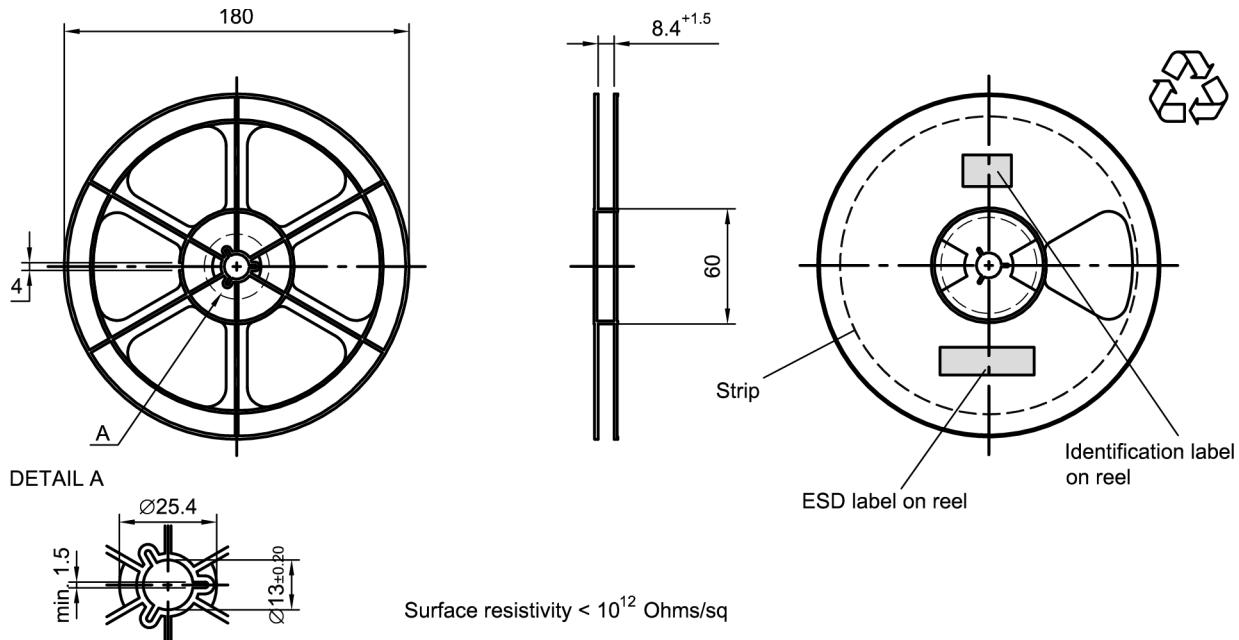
Drawing of reel (first-angle projection) with diameter of 180 mm.
